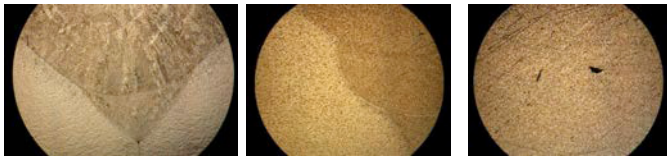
Macroscopic images of multi-pass welding from work piece Nr 1. (cross-section)
